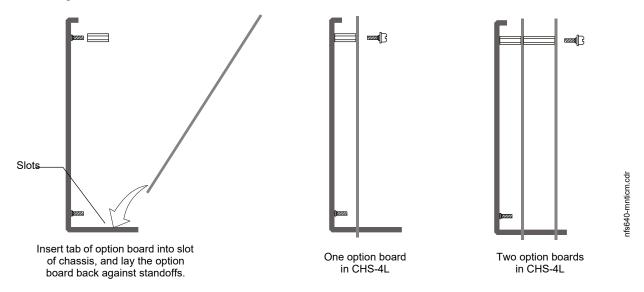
Mounting NCM in a Chassis (CHS-4L Shown)
